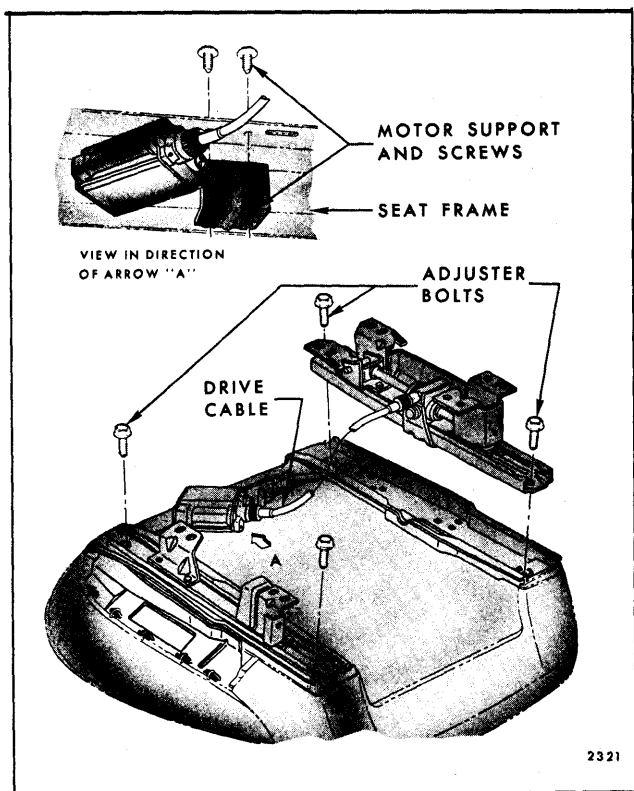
Power Horizontal Bucket Seat Adjuster Removal
